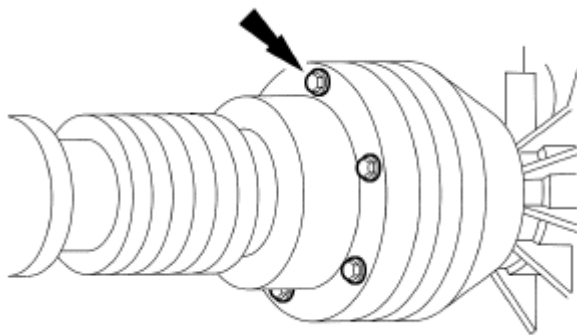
Locating Driveshaft-To-Power Take Off Bolts & Washers
